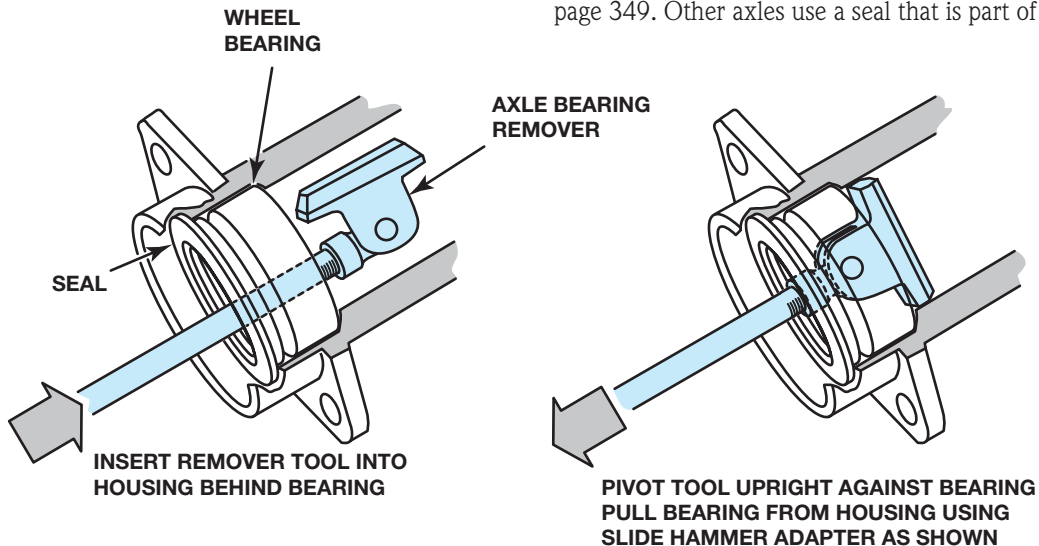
This axle bearing remover is attached to a slide hammer, and it is slid through the bearing and pivoted to catch the bearing and seal.
